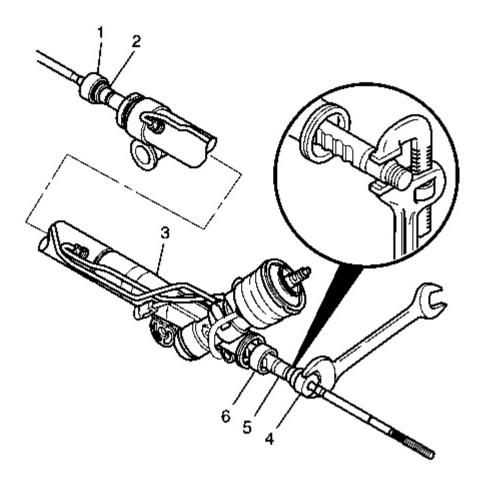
Left Inner Tie Rod Housing, Shock Dampener & Rack Courtesy of GENERAL MOTORS CORP.
